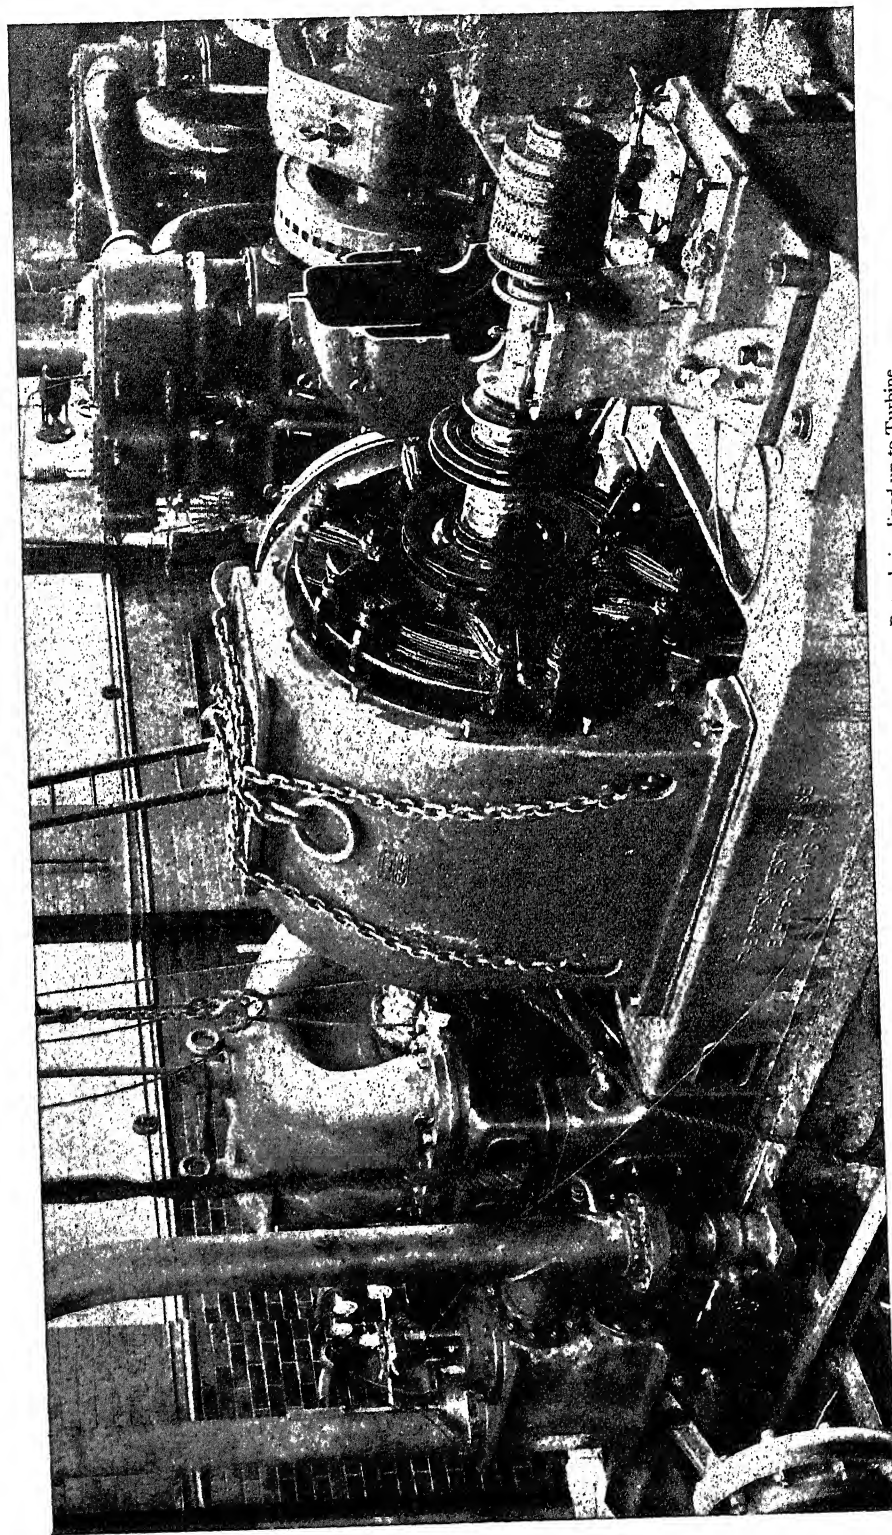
1000-kw. Turbo-alternator Set partly erected, Generator Rotor being lined up to Turbine
